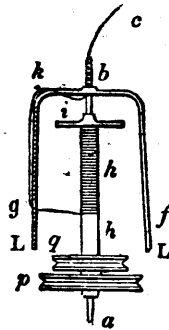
Spindle, with flyer and bobbin, of the Household Flax Wheel.
